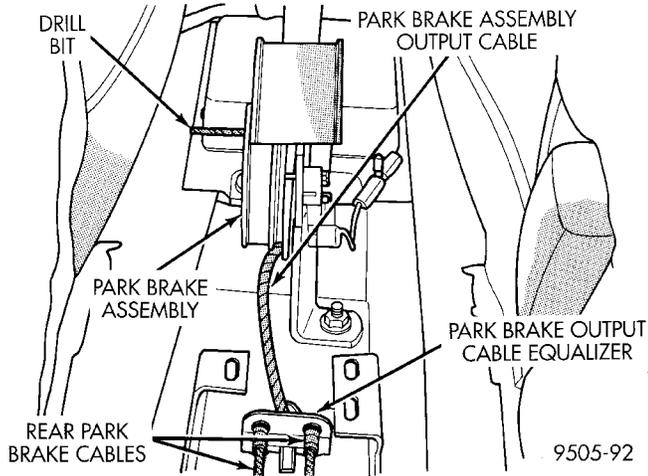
Park Brake Cables Properly Installed In Equalizer
